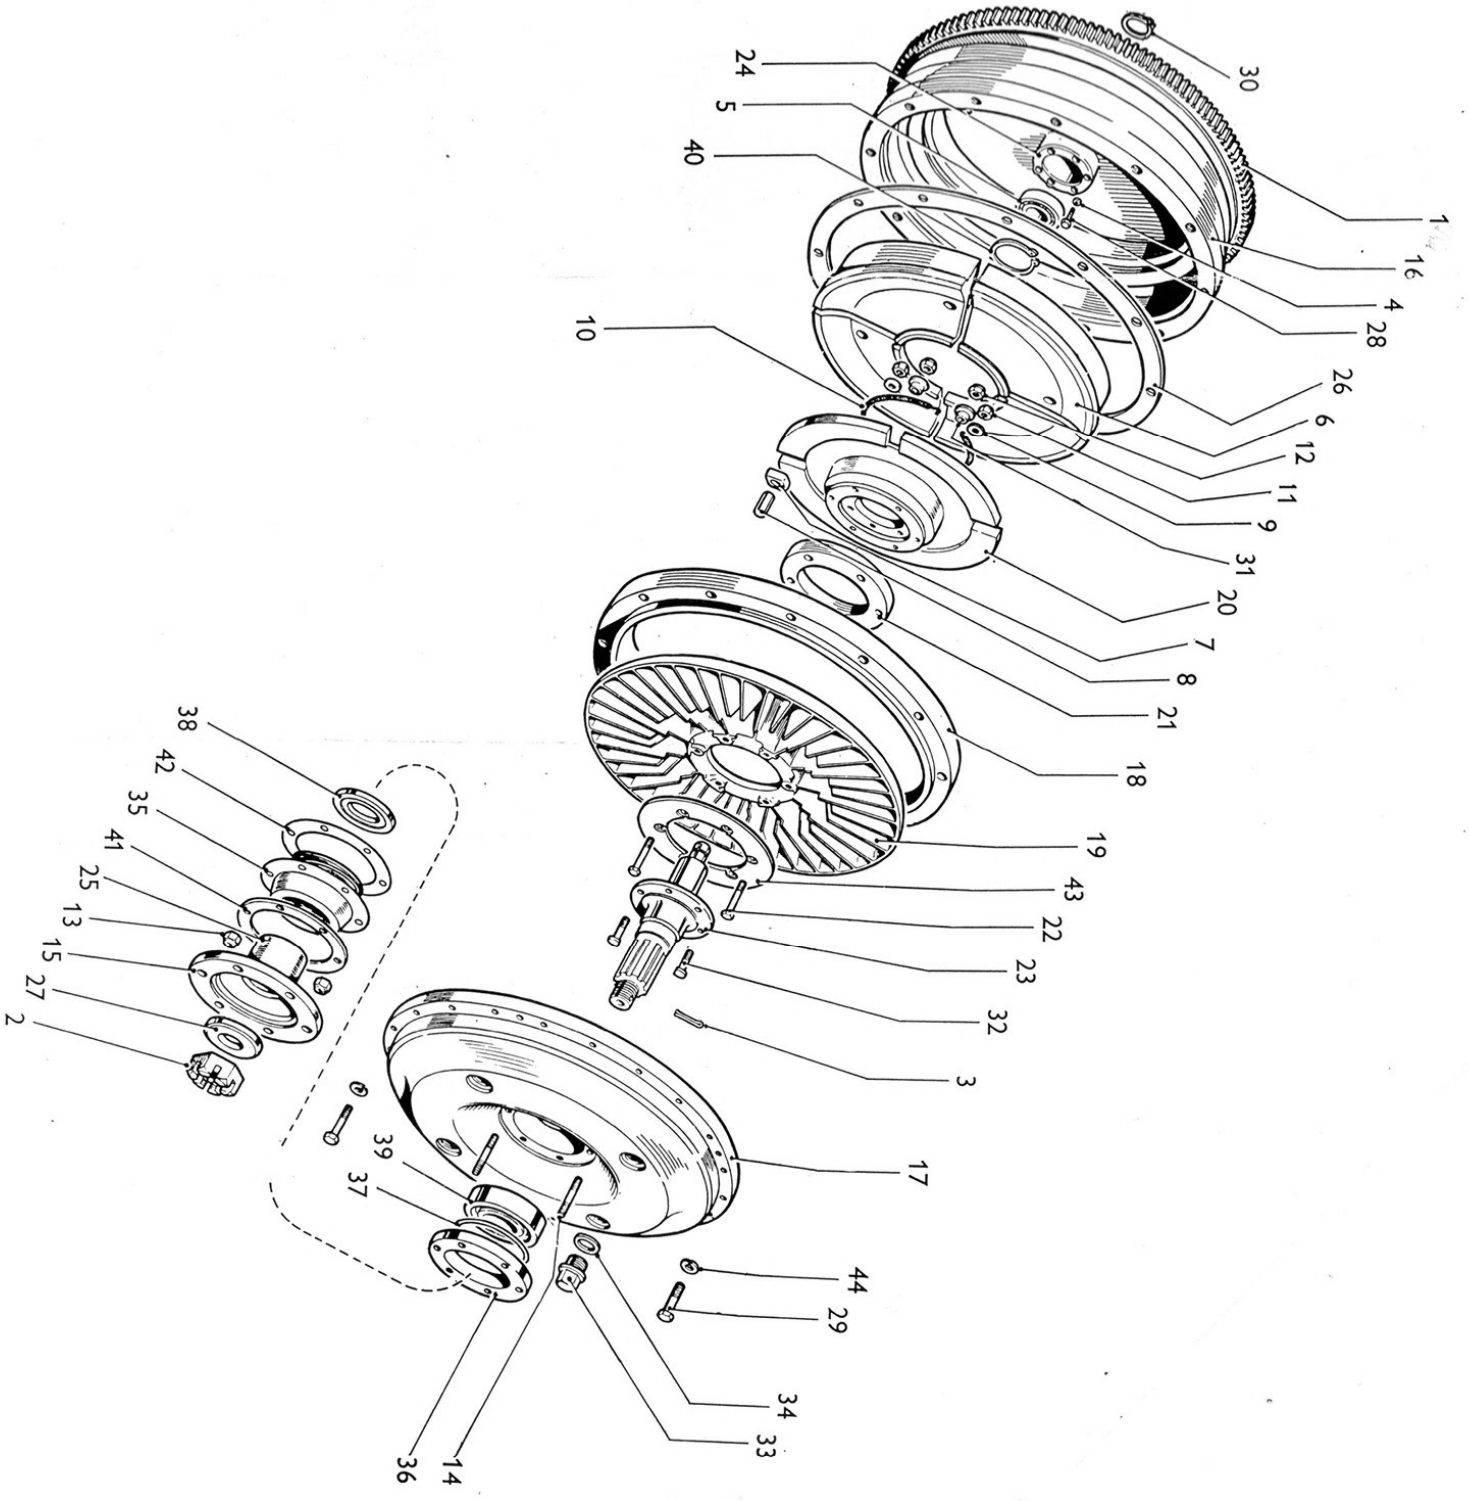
EXPLODED VIEW OF THE 20" FLUID CLUTCH
